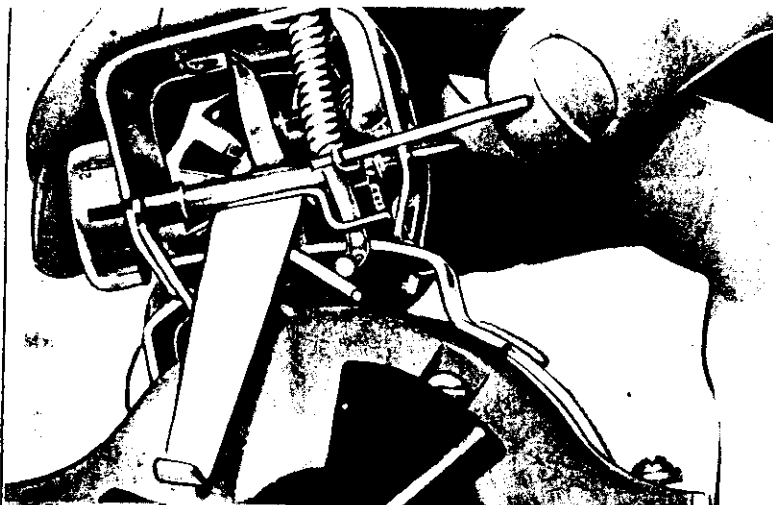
ATTACHING T2E1 DEVICE TO BAR TYPE VT FUZE.
